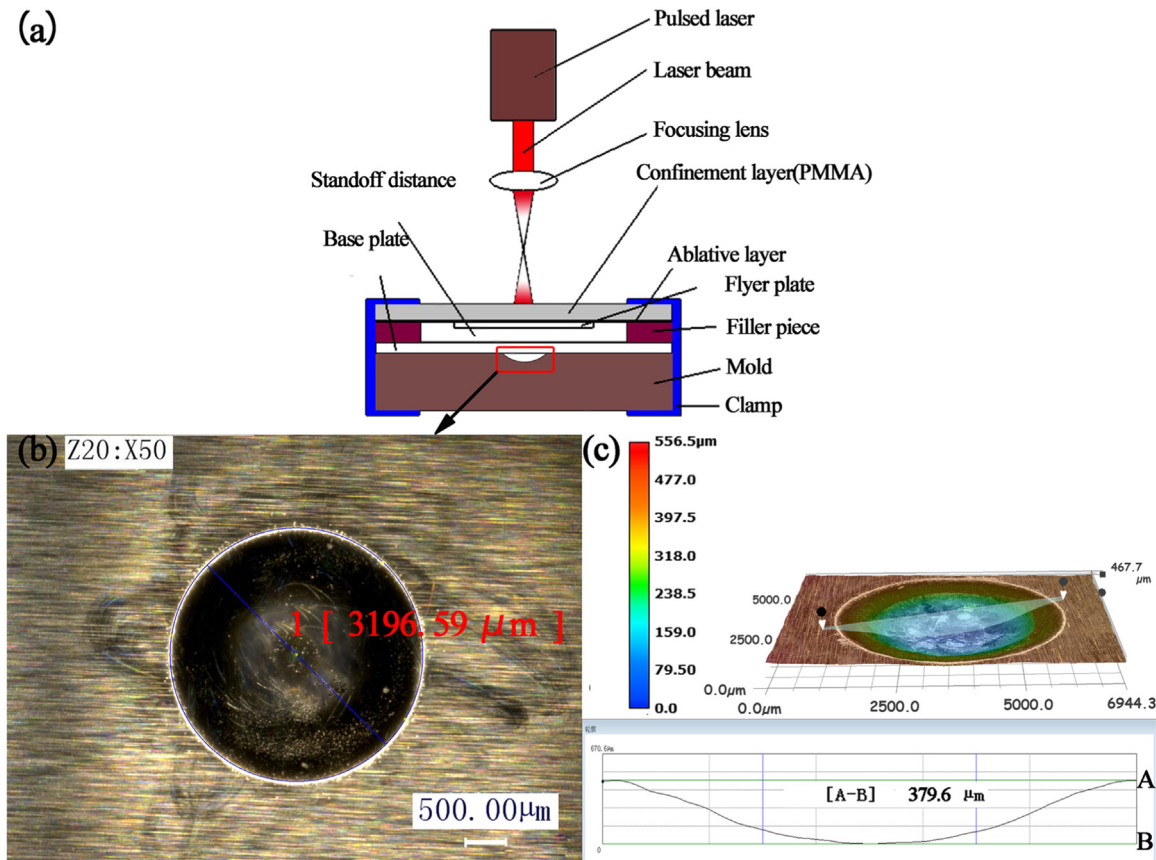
Schematic diagram of laser shock synchronous welding and forming process: (a) schematic diagram of setup; (b) 2D profile of the mold; (c) 3D profile of the mold.
